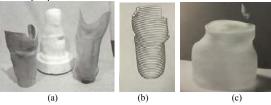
AM of socket (a) the wooden and SLA sockets and the plaster mold, (b) layer-by-layer deposition concept and (c) socket by AM [25, 26].
